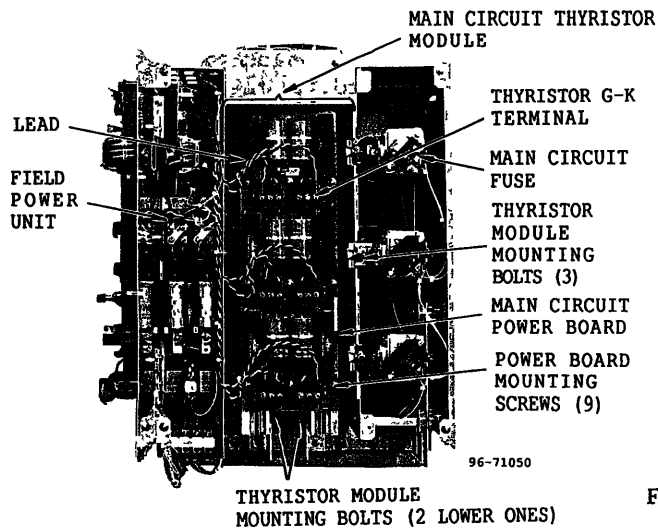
Main Circuit Thyristor Assembly (230 V, 260 A System)
